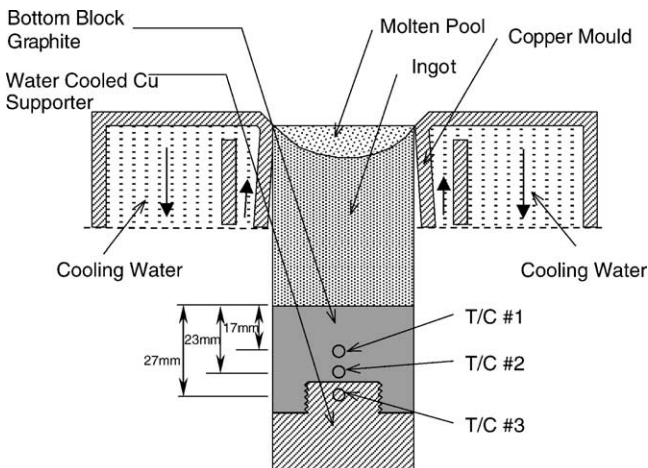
Schematic cross sectional view of mould and ingot assembly.
